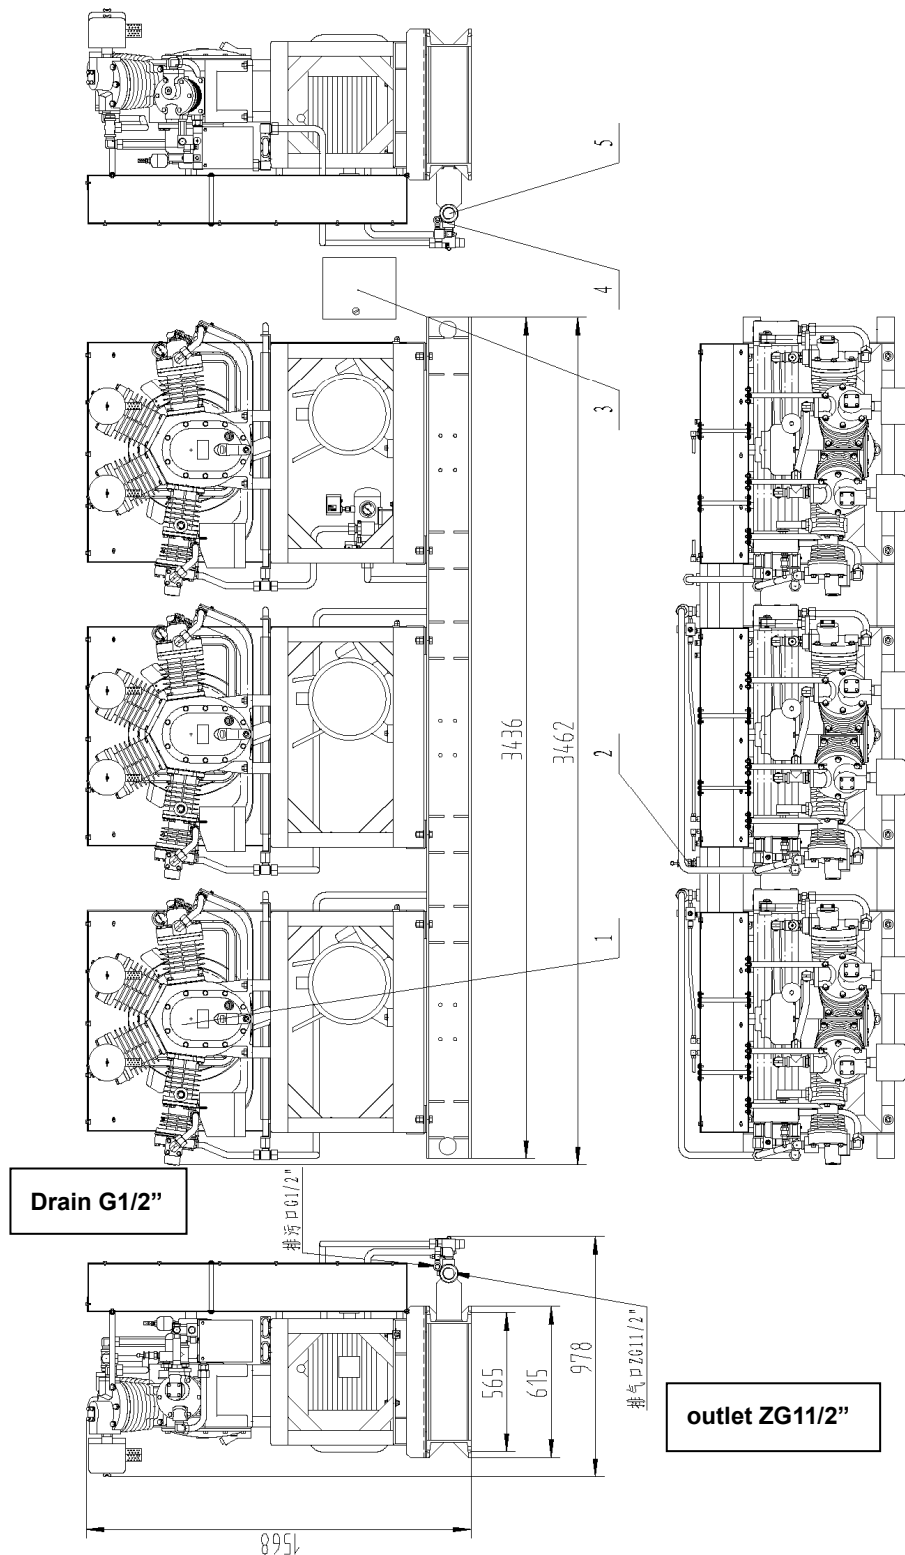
Figure D: Outline Drawing of 34SH Horizontal Double-Engine Unit
